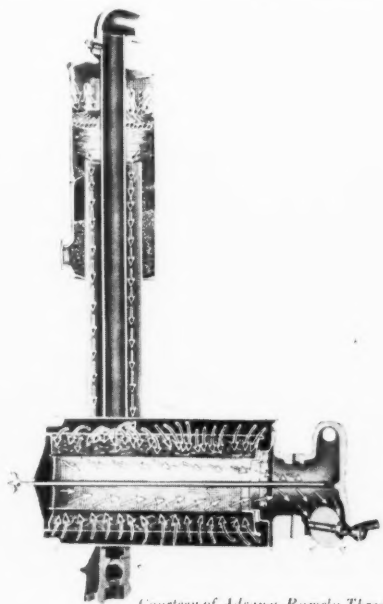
Showing the two stage air cleaner employed on the Oilpull tractor. In this device air is first passed through a centrifugal separator and then through an oil soaked moss-type filter. Arrows indicate course of air flow.
